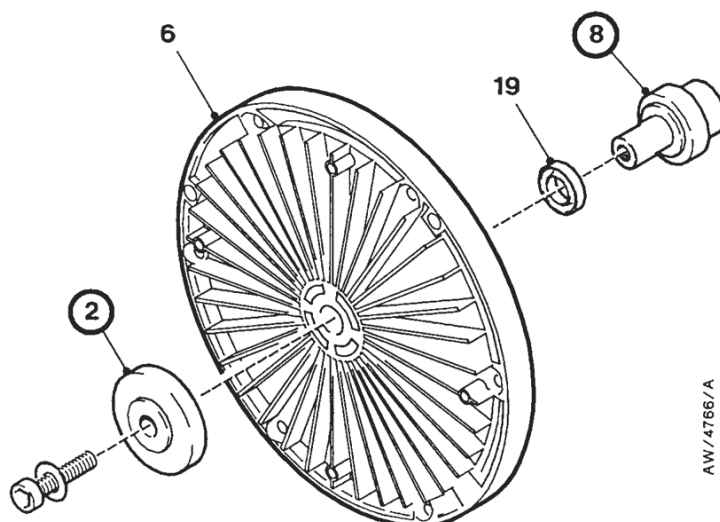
Fit the Shaft Seal in the ESDP30/30A Seal Housing
